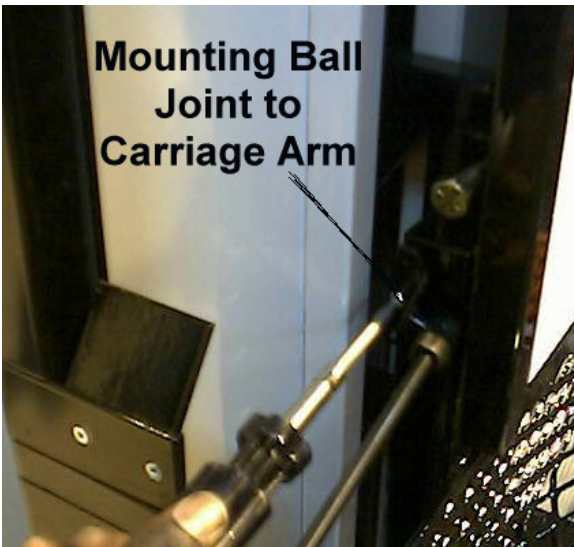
MOUNTING BALL JOINT TO CARRIAGE ARM
